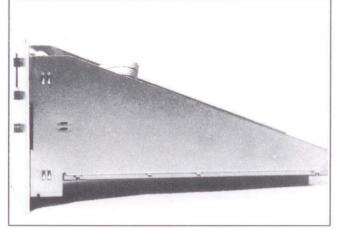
Electronic unit designed for mounting in 19" Eurorack.
